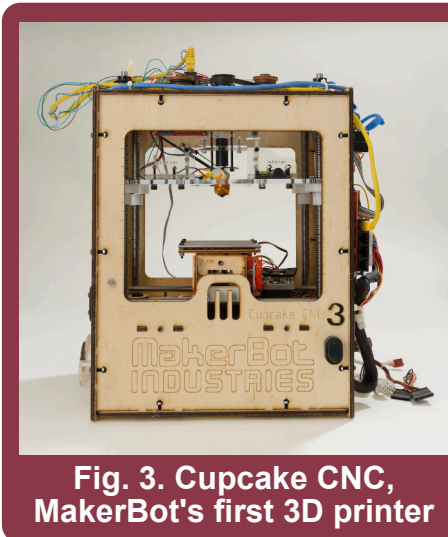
Cupcake CNC, MakerBot's first 3D printer
